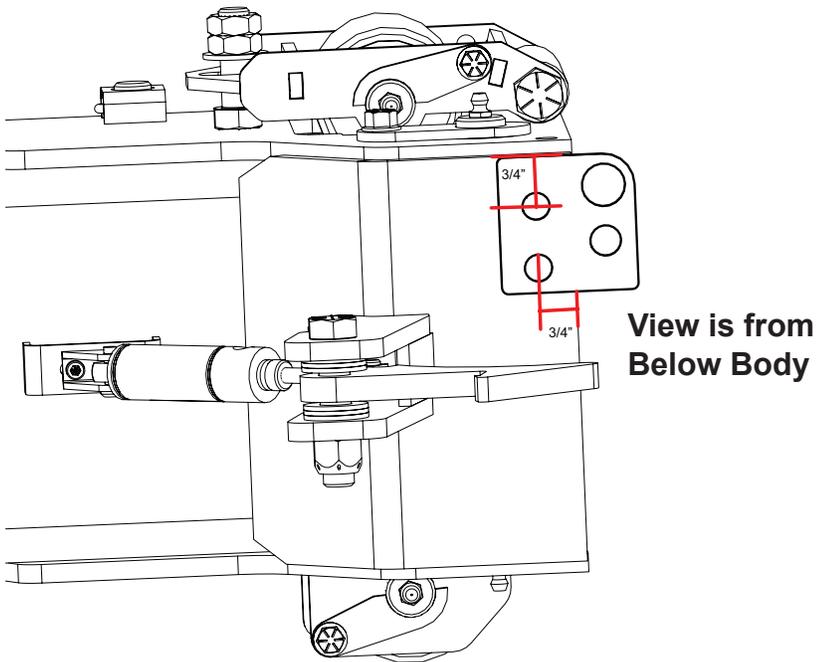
View from Below Body. Measure and place the boom retainer plate assembly (P/N 1515394).
